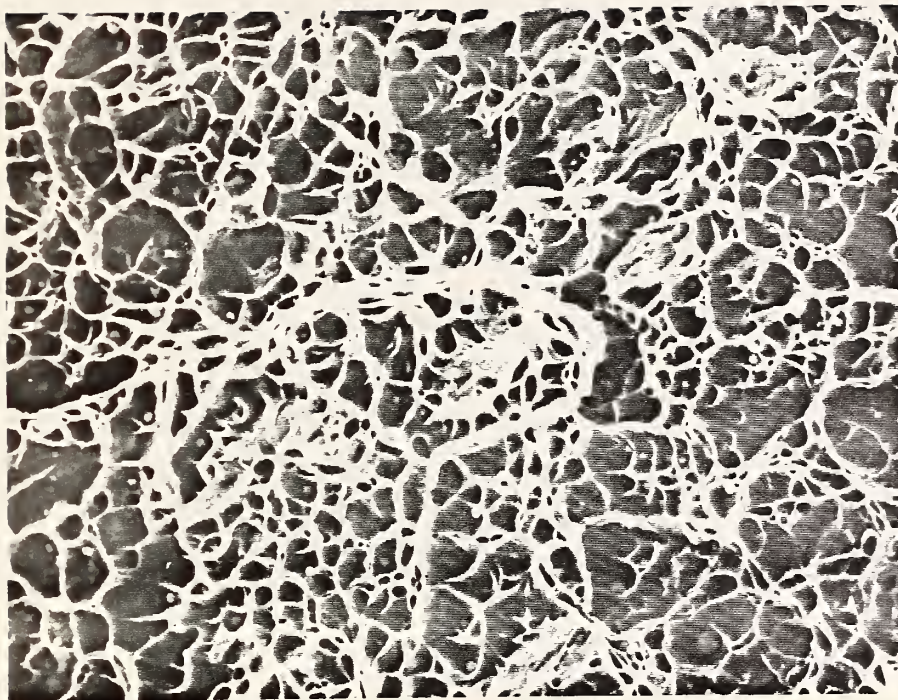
Similarities in the shape and spacing of ferrite morphologies of polished specimens and the tear-ridge networks on the fracture surface for weld 12.
